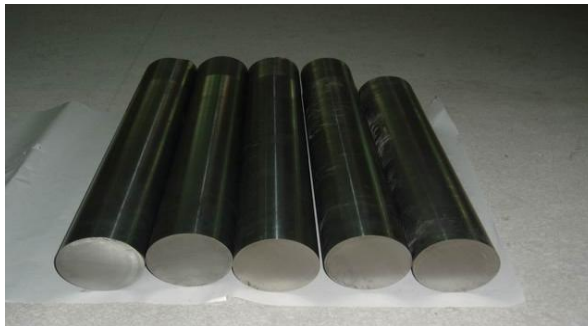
Cylindrical rod mild steel before being cut off to appropriate dimensions
